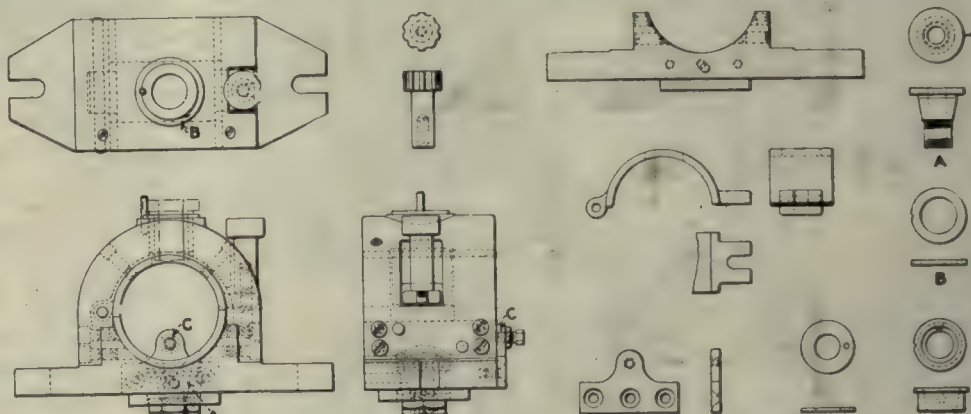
DETAILS OF PISTON-PIN-BORING FIXTURE
